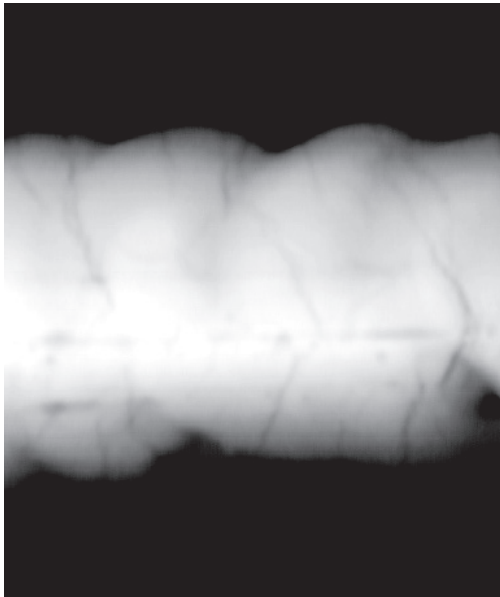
DFS exposure of test weld BAM 5 (8 mm mild steel weld) after high pass filtering.
